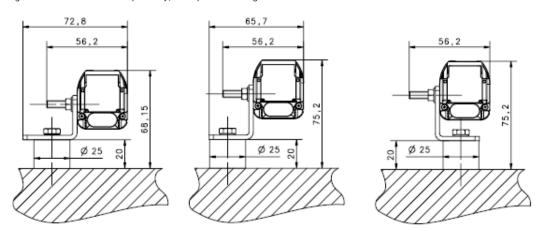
Accessories - order separately, L-shaped mounting brackets in combination with vibration damper
